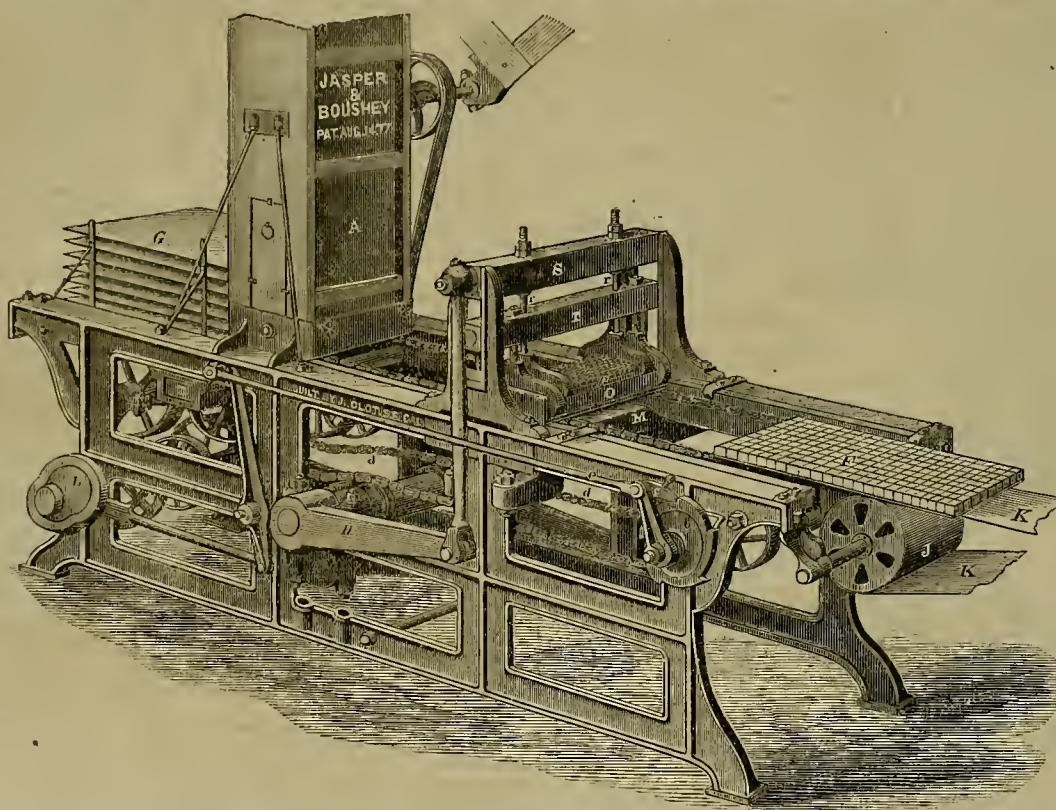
, JASPER & BOUSHEY'S IMPROVED MACHINE FOR MANUFACTURING CUBE SUGAR.
